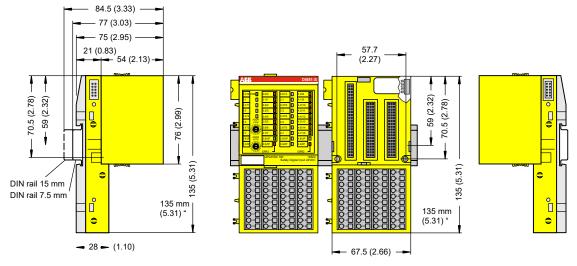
Dimensions of TU582-S safety I/O terminal unit
